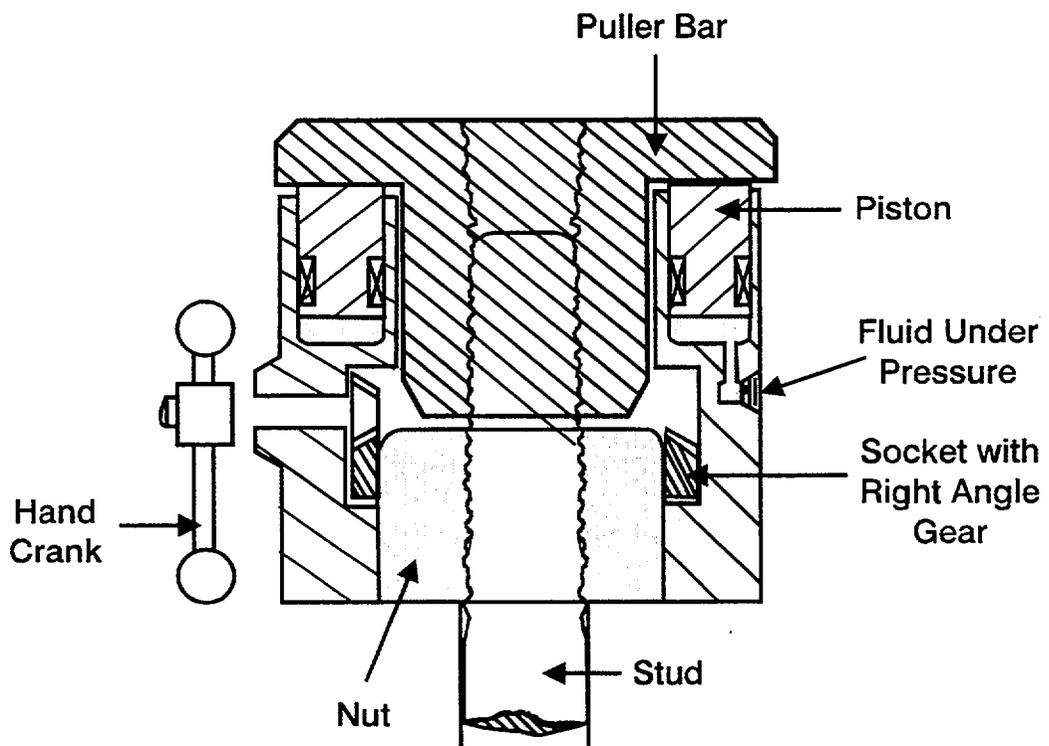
Cross Section of a Hydraulic Tensioner.
